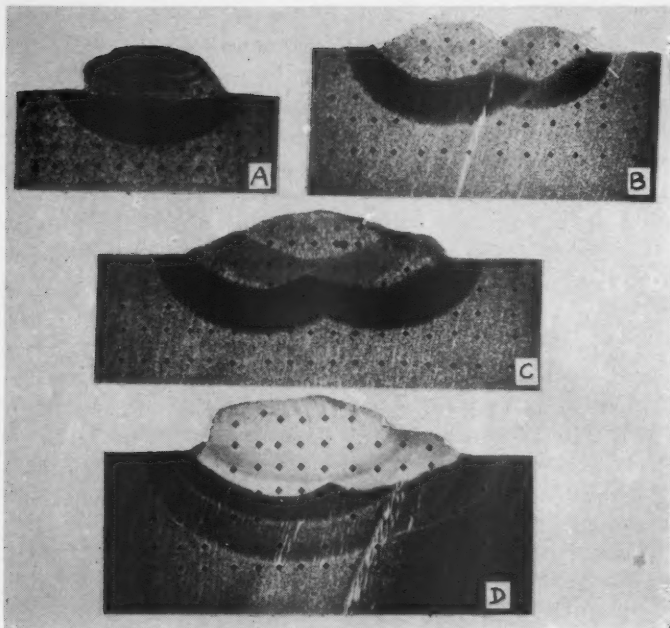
(A) SINGLE BEAD WELD ON AN AIR HARDENING STEEL. AN EXCEEDINGLY HARD ZONE HAS BEEN PRODUCED IN THE BASE METAL ADJACENT TO THE WELD AS EVIDENCED BY THE VICKERS' HARDNESS TABULATIONS. (B) A SECOND WELD BEAD HAS BEEN LAYED BESIDE THE WELD SHOWN IN A. PART OF THE HARDNESS OF THE FIRST PASS HAS BEEN REDUCED BUT A NEW HARDENED ZONE HAS BEEN CREATED. (C) A THIRD WELD BEAD HAS BEEN LAYED OVER THE TWO WELD BEADS SHOWN IN B. THE HARDENING EFFECT OF THE FIRST TWO BEADS HAS BEEN SUFFICIENTLY REDUCED BUT A SMALL HARDENED AREA BENEATH THE THIRD BEAD HAS BEEN CREATED. (D) A FOURTH BEAD HAS BEEN APPLIED OVER THE THIRD BEAD OF C. BY THE APPLICATION OF A MULTIPLE LAYER SEQUENCE OF WELDING, HARDENED AREAS IN THE PARENT METAL HAVE BEEN REMOVED.
